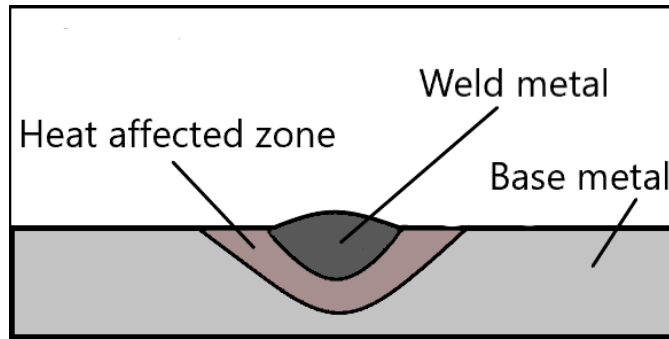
Heat-affected zone: A cross-section of a welding bead on a substrate. The fully melted metal is called the weld metal and is a combination of melted base metal and filler metal. The heat-affected zone (HAZ) is the area surrounding the welding metal which has not melted, but is still structurally affected by the heat input.
